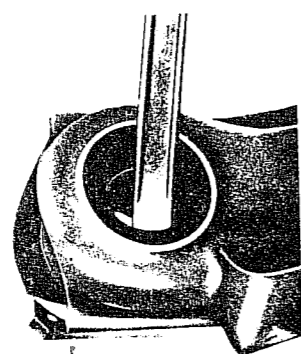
Levering out the hub inner oil seal - D/J axle.
